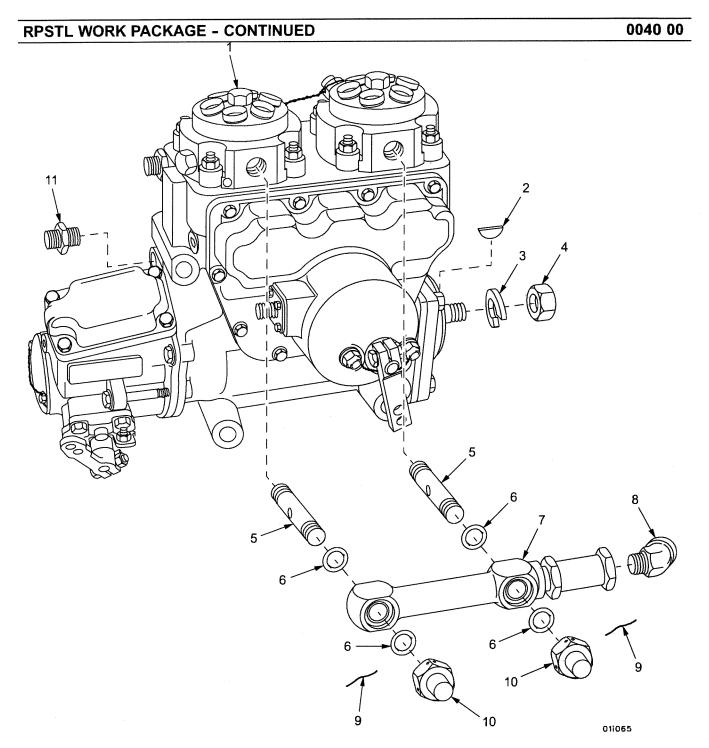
Bleeder Housing, Valve Assembly and Associated Parts.
